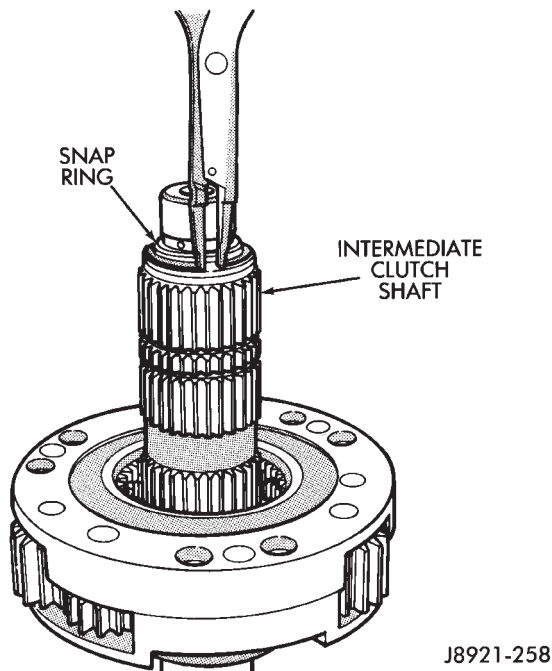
Intermediate Clutch Shaft Snap Ring Removal
